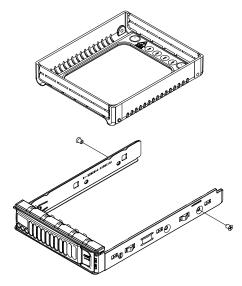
Removing a Dummy Drive from the Drive Carrier
